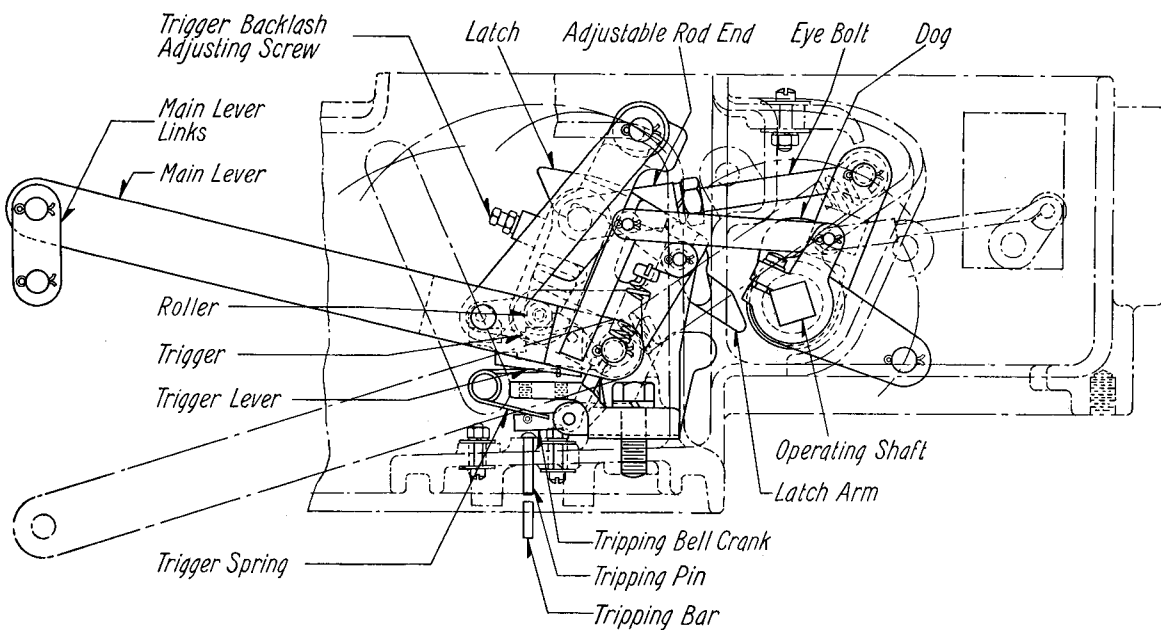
MECHANISM OPERATING LEVERS (SIDE VIEW)
